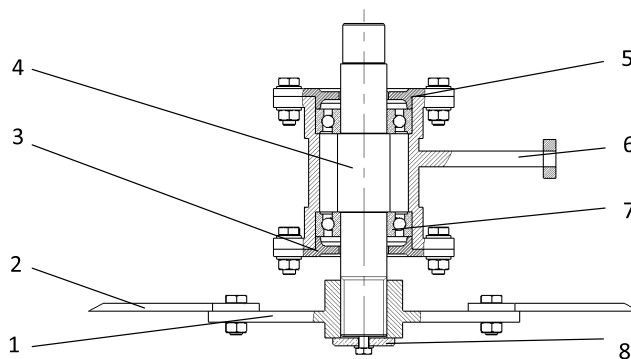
Overall structure of cutting device. 1.Cutter plate 2.Blade 3.Lower bearing end cap 4.Cutter shaft 5.Upper bearing end cap 6.Fixed sleeve 7. Bearing 8. Shaft end ring.
